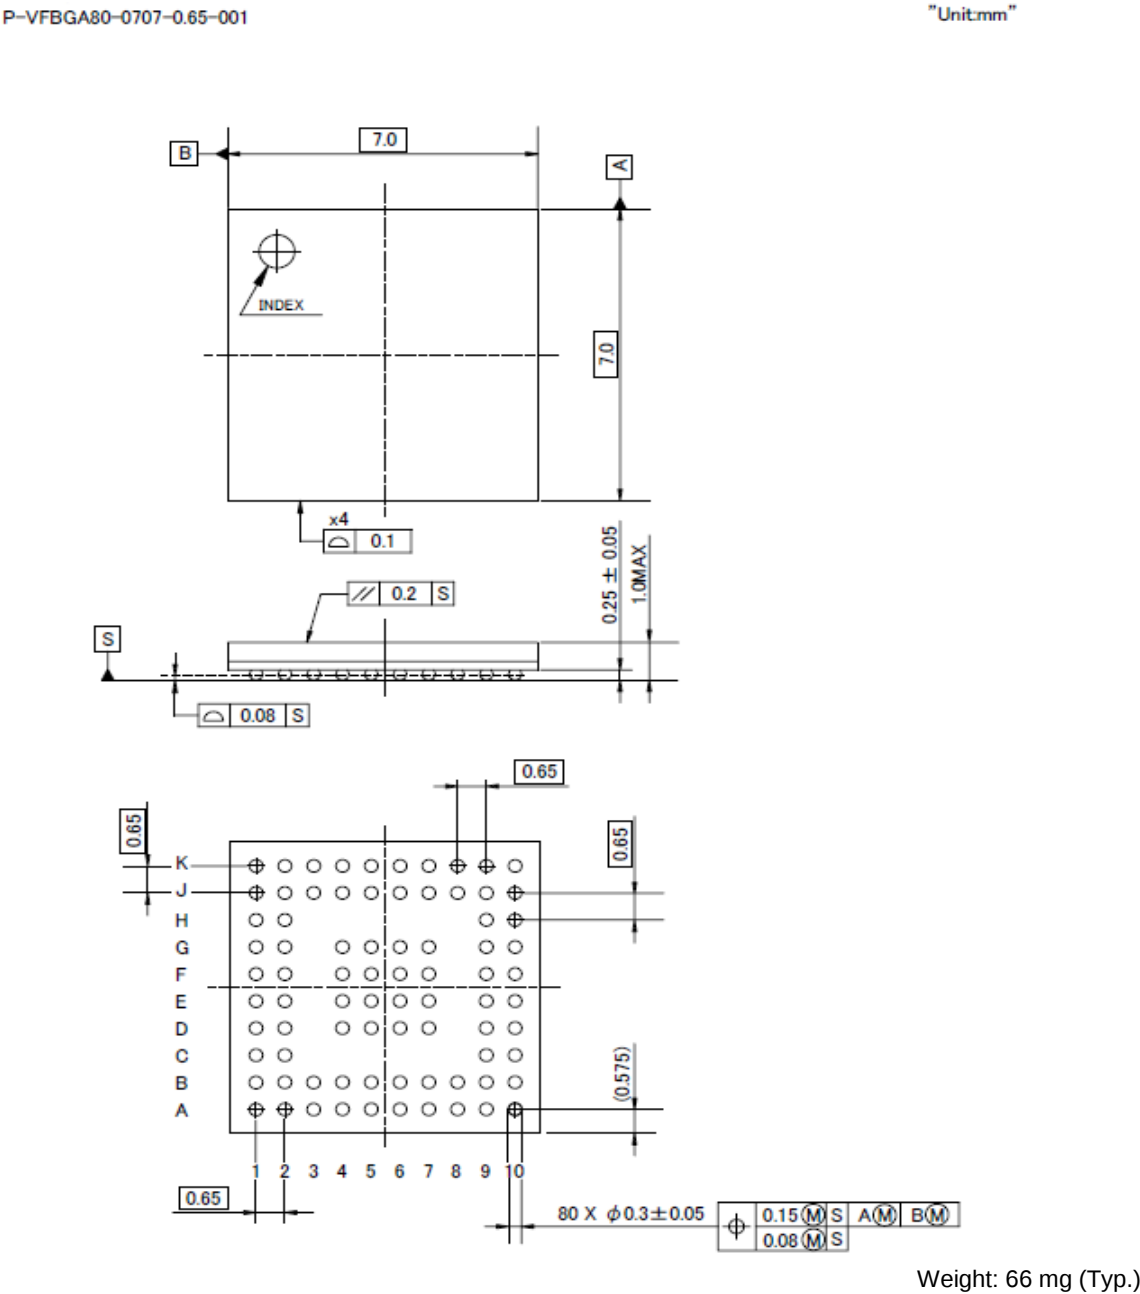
TC9594XBG P-VFBGA80-0707-0.65-001 package
